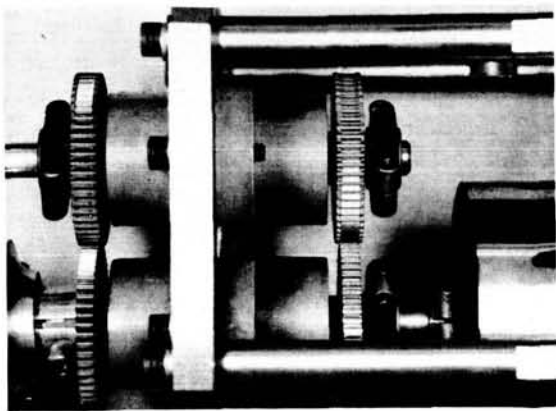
The *in situ* coated gears after the test. Note the wear path of the narrow gear in the larger gear.
